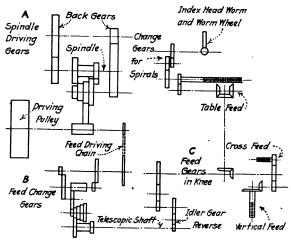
Diagram of gears in universal milling machine. (Brown & Sharpe.)
